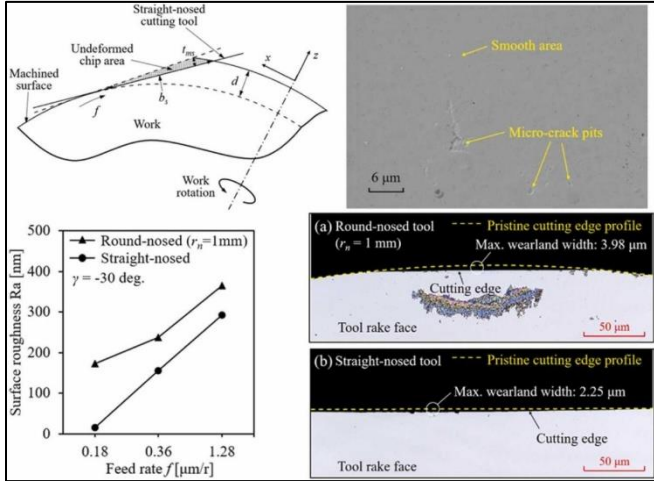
Schematics illustrating the cutting principles of using (a) round-nosed, A comparison of the machined surface roughness (a) and width of cut and Overall cutting edge condition of the (a) round-nosed and (b) straight-nosed cutting tools after machining the Zerodur samples for 1.07 kilometres (Feed rate $f = 0.36 \mu\text{m/r}$, depth of cut $d = 1 \mu\text{m}$, tool rake angle $\gamma = 0 \text{ deg.}$) [9]
